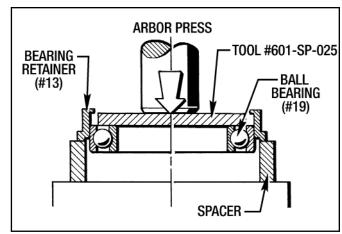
Removing Ball Bearing (#19) from Bearing Retainer (#13)
